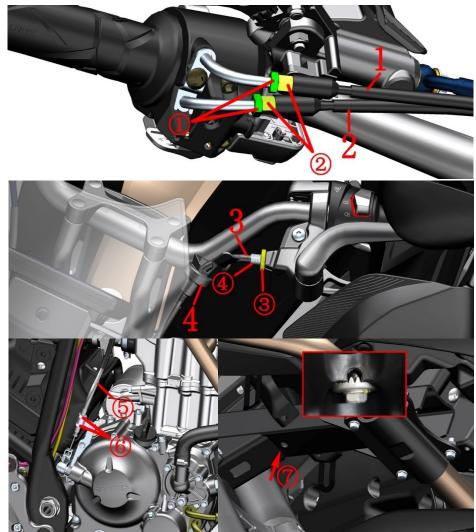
FRONT FORK		Throttle/clutch cable clearance adjustmen,	СНК	Q
